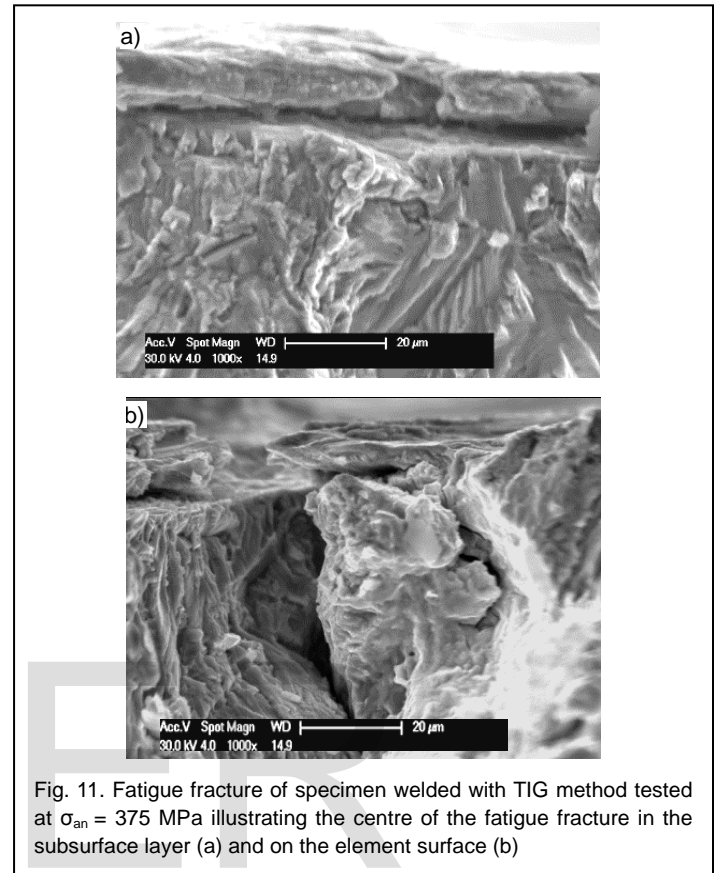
Fatigue fracture of specimen welded with TIG method tested at $\sigma_{an} = 375$ MPa illustrating the centre of the fatigue fracture in the subsurface layer (a) and on the element surface (b)
